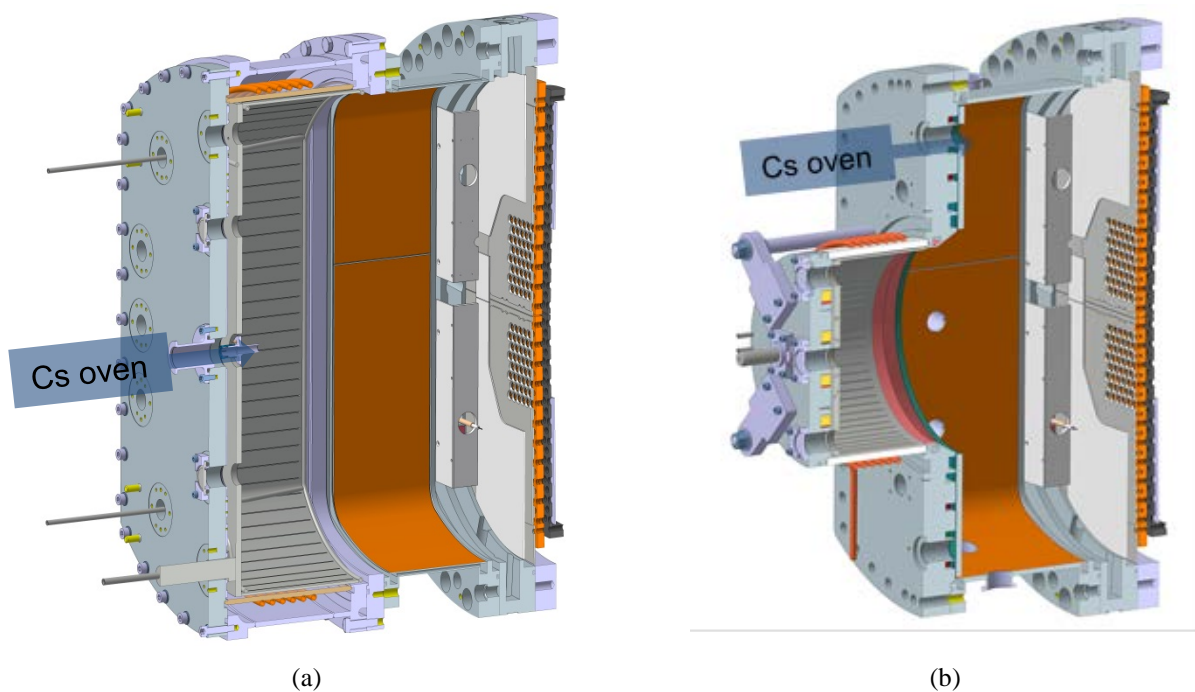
Drawing of the BATMAN source with racetrack shaped driver (a) and cylindrical driver (b).
